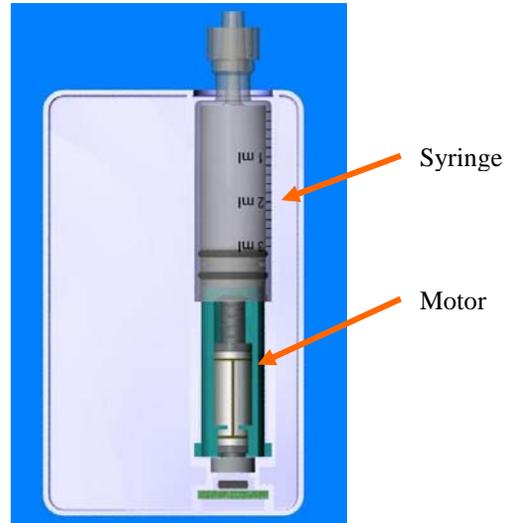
Drug Pump Showing the SQUIGGLE Motor Pushing a Syringe
